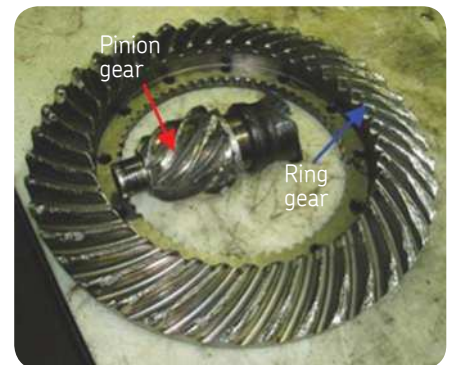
Severe damages on the pinion and the ring gear due to misalignment between these two machine parts.
